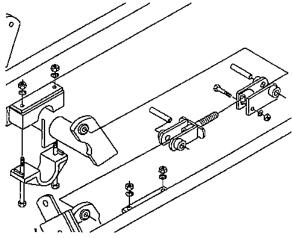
WHEEL LIFT CONN. ASSEMBLY
